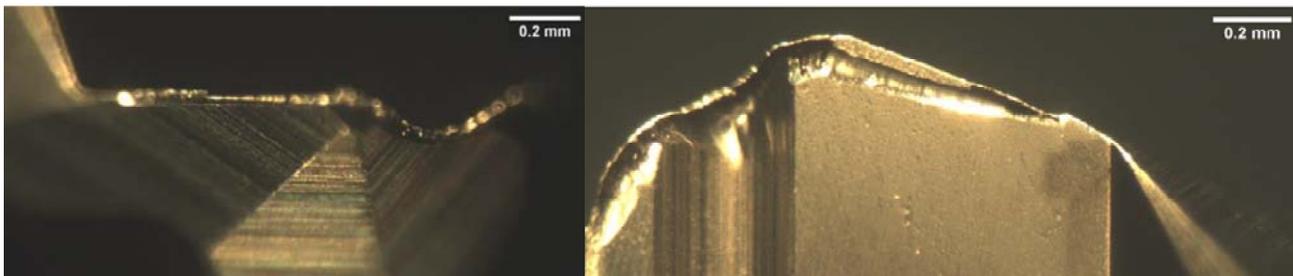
Manual honed tool after drilling 250 holes, flank (a), rake face (b).
